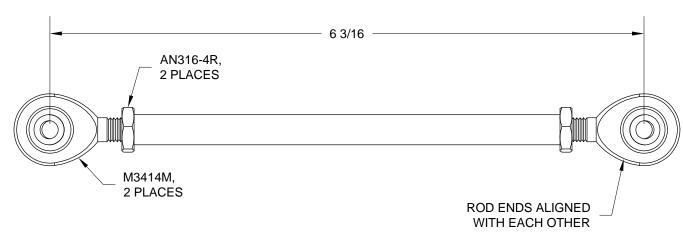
PITCH SERVO PUSHROD ASSEMBLY
